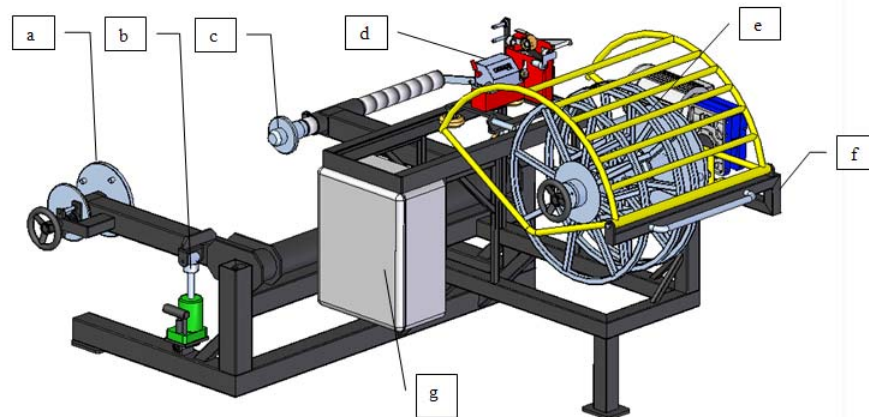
The most important subassemblies and components of a CAD model of a cable rewriter: a) unwinder journal with a brake, b) hydraulic jack, c) pressure journal, d) lying device with a measurement module, e) framework bobbin of a winder, f) supporting structure, g) electrical box (Source: own elaboration)
